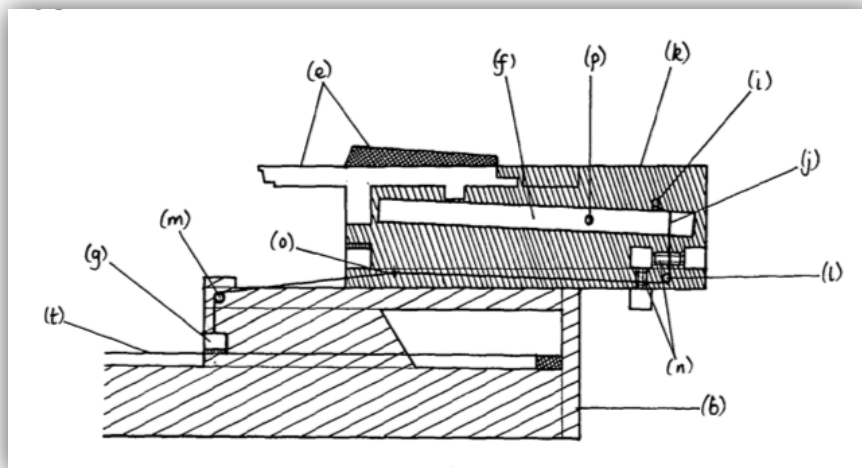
Patent Drawing showing the keyboard to damper bar coupling
